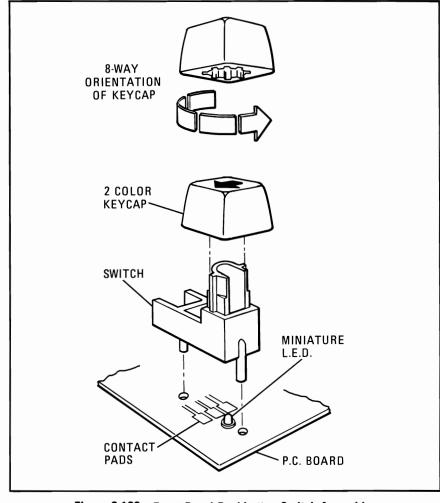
Front-Panel Pushbutton Switch Assembly
